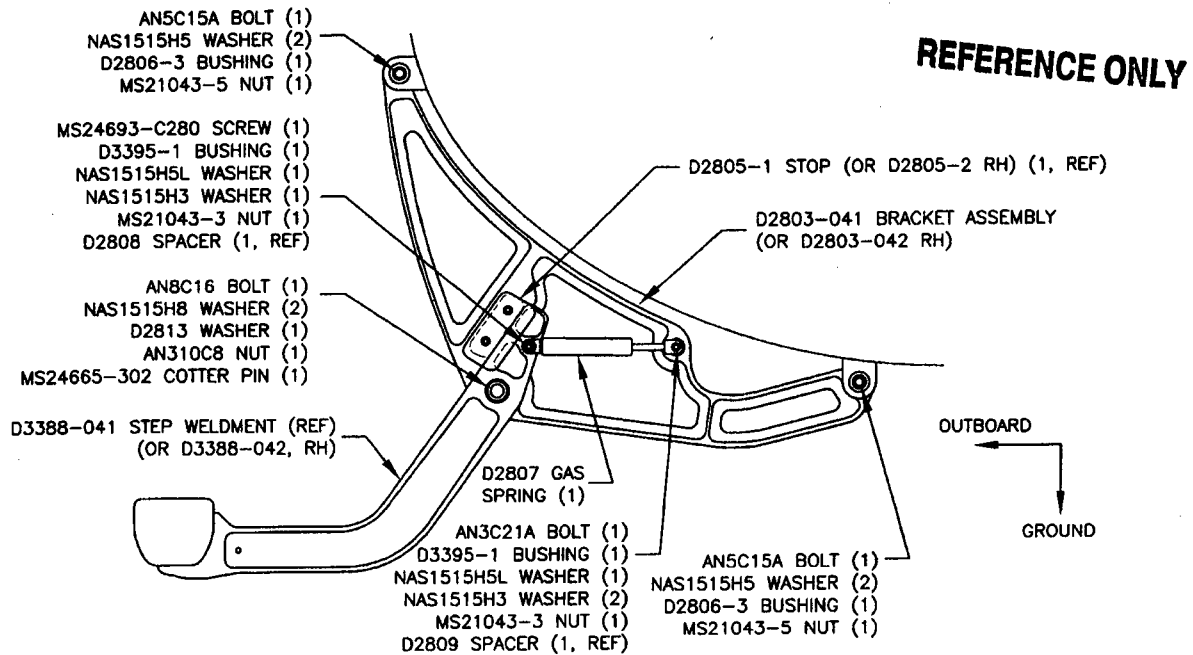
Strut Detail for D412-630-023/-024 *Heli-Access-Step*™ Installation
